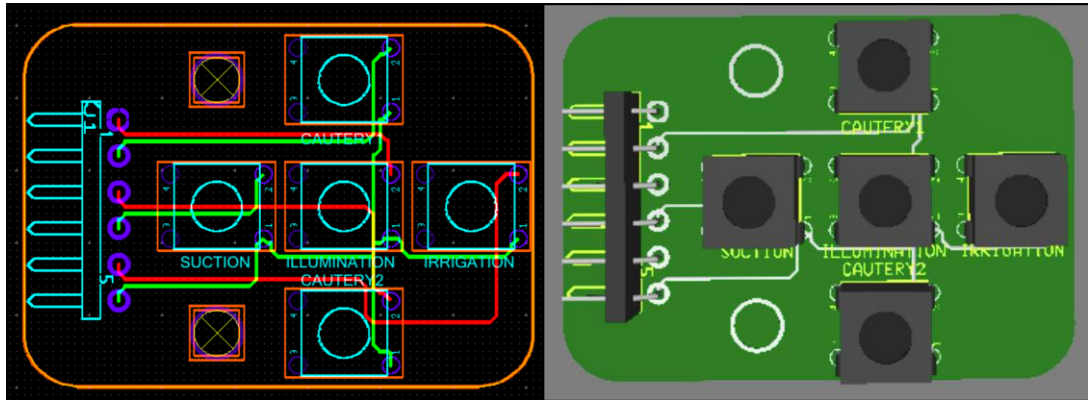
2D schematic and 3D model of PCB Design 2 (rounded rectangular)
